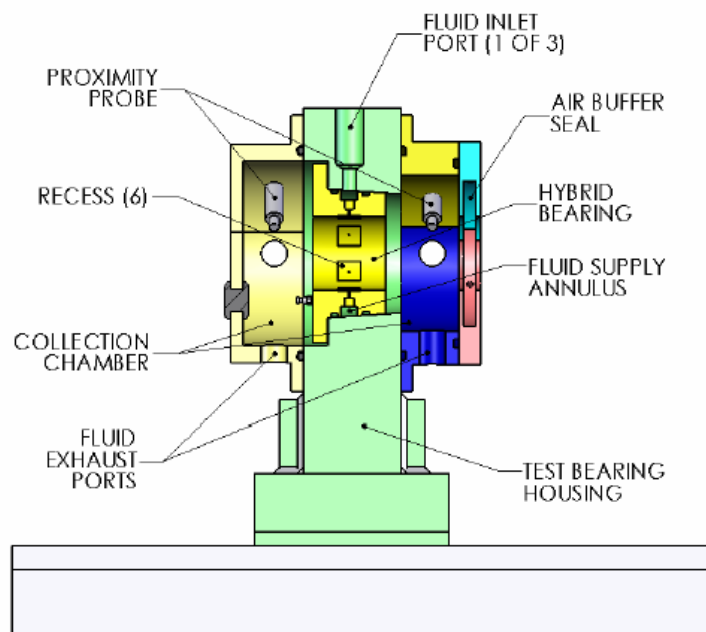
Cross-sectional view from Solidworks of the test bearing support pedestal by Pavelek [5].
